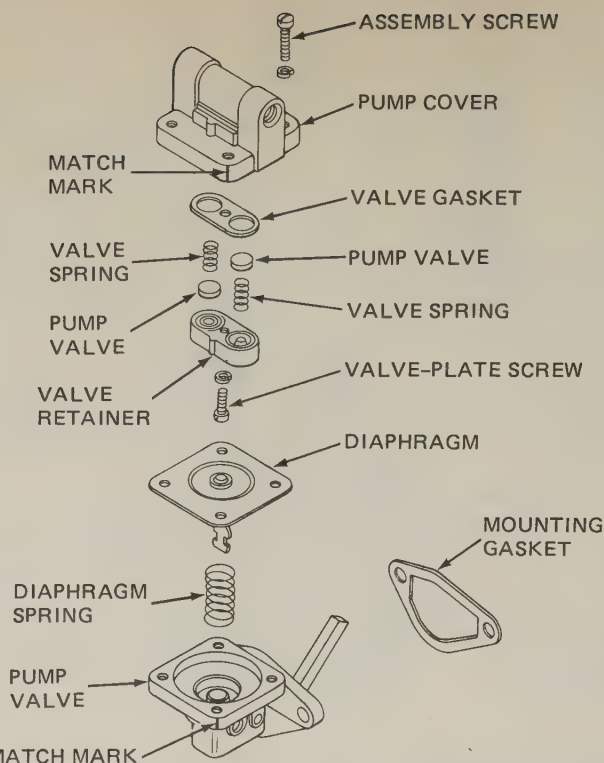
Disassembled view of a fuel pump for a small engine. (Kohler Company)
